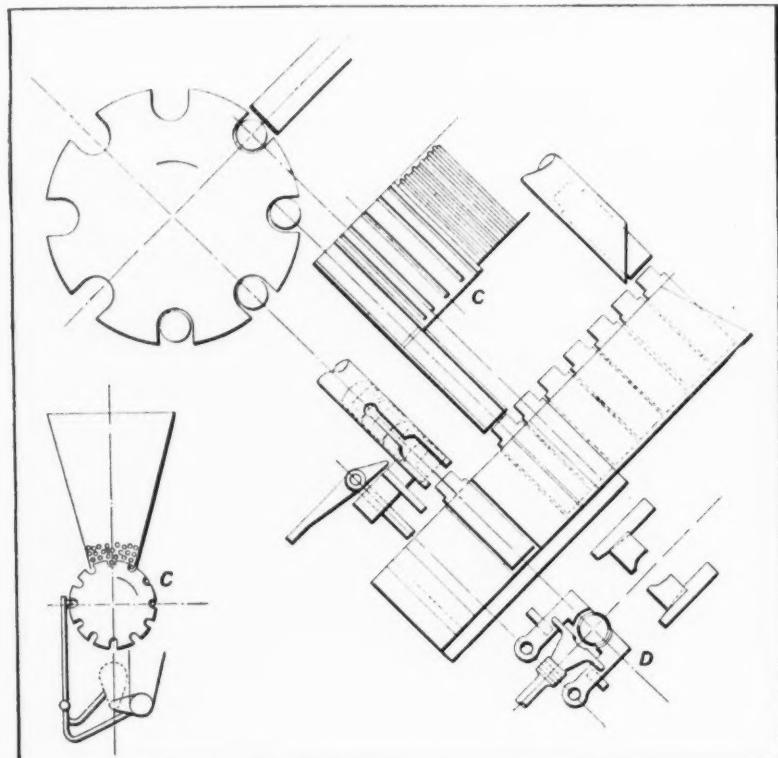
Drum Type Mechanism Designed for Loading Pencil Leads into Boxes
